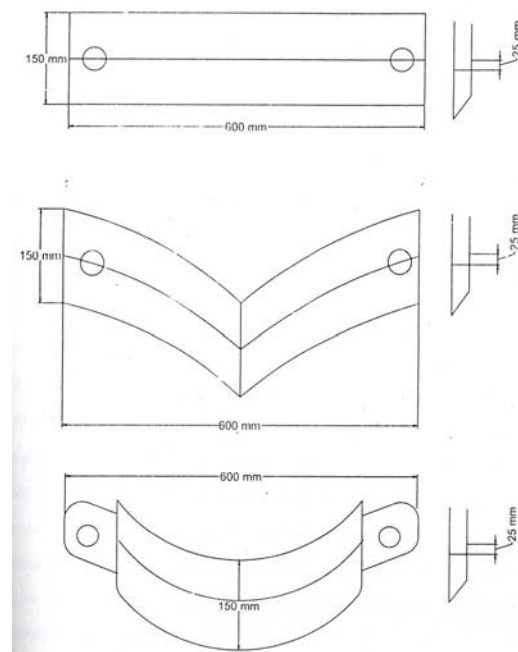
Detailed dimensions of straight, V-shape and curved shape castor stalk uprooting blades
